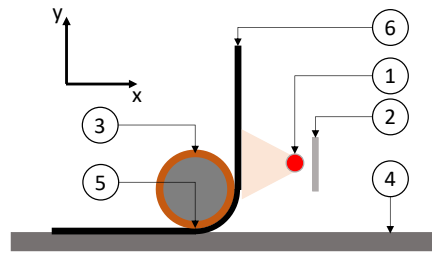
ATL machine components. (1) Infrared heating element. (2) Reflection plate. (3) Compaction roll. (4) Mould. (5) Nip point (6) Material feeding.
